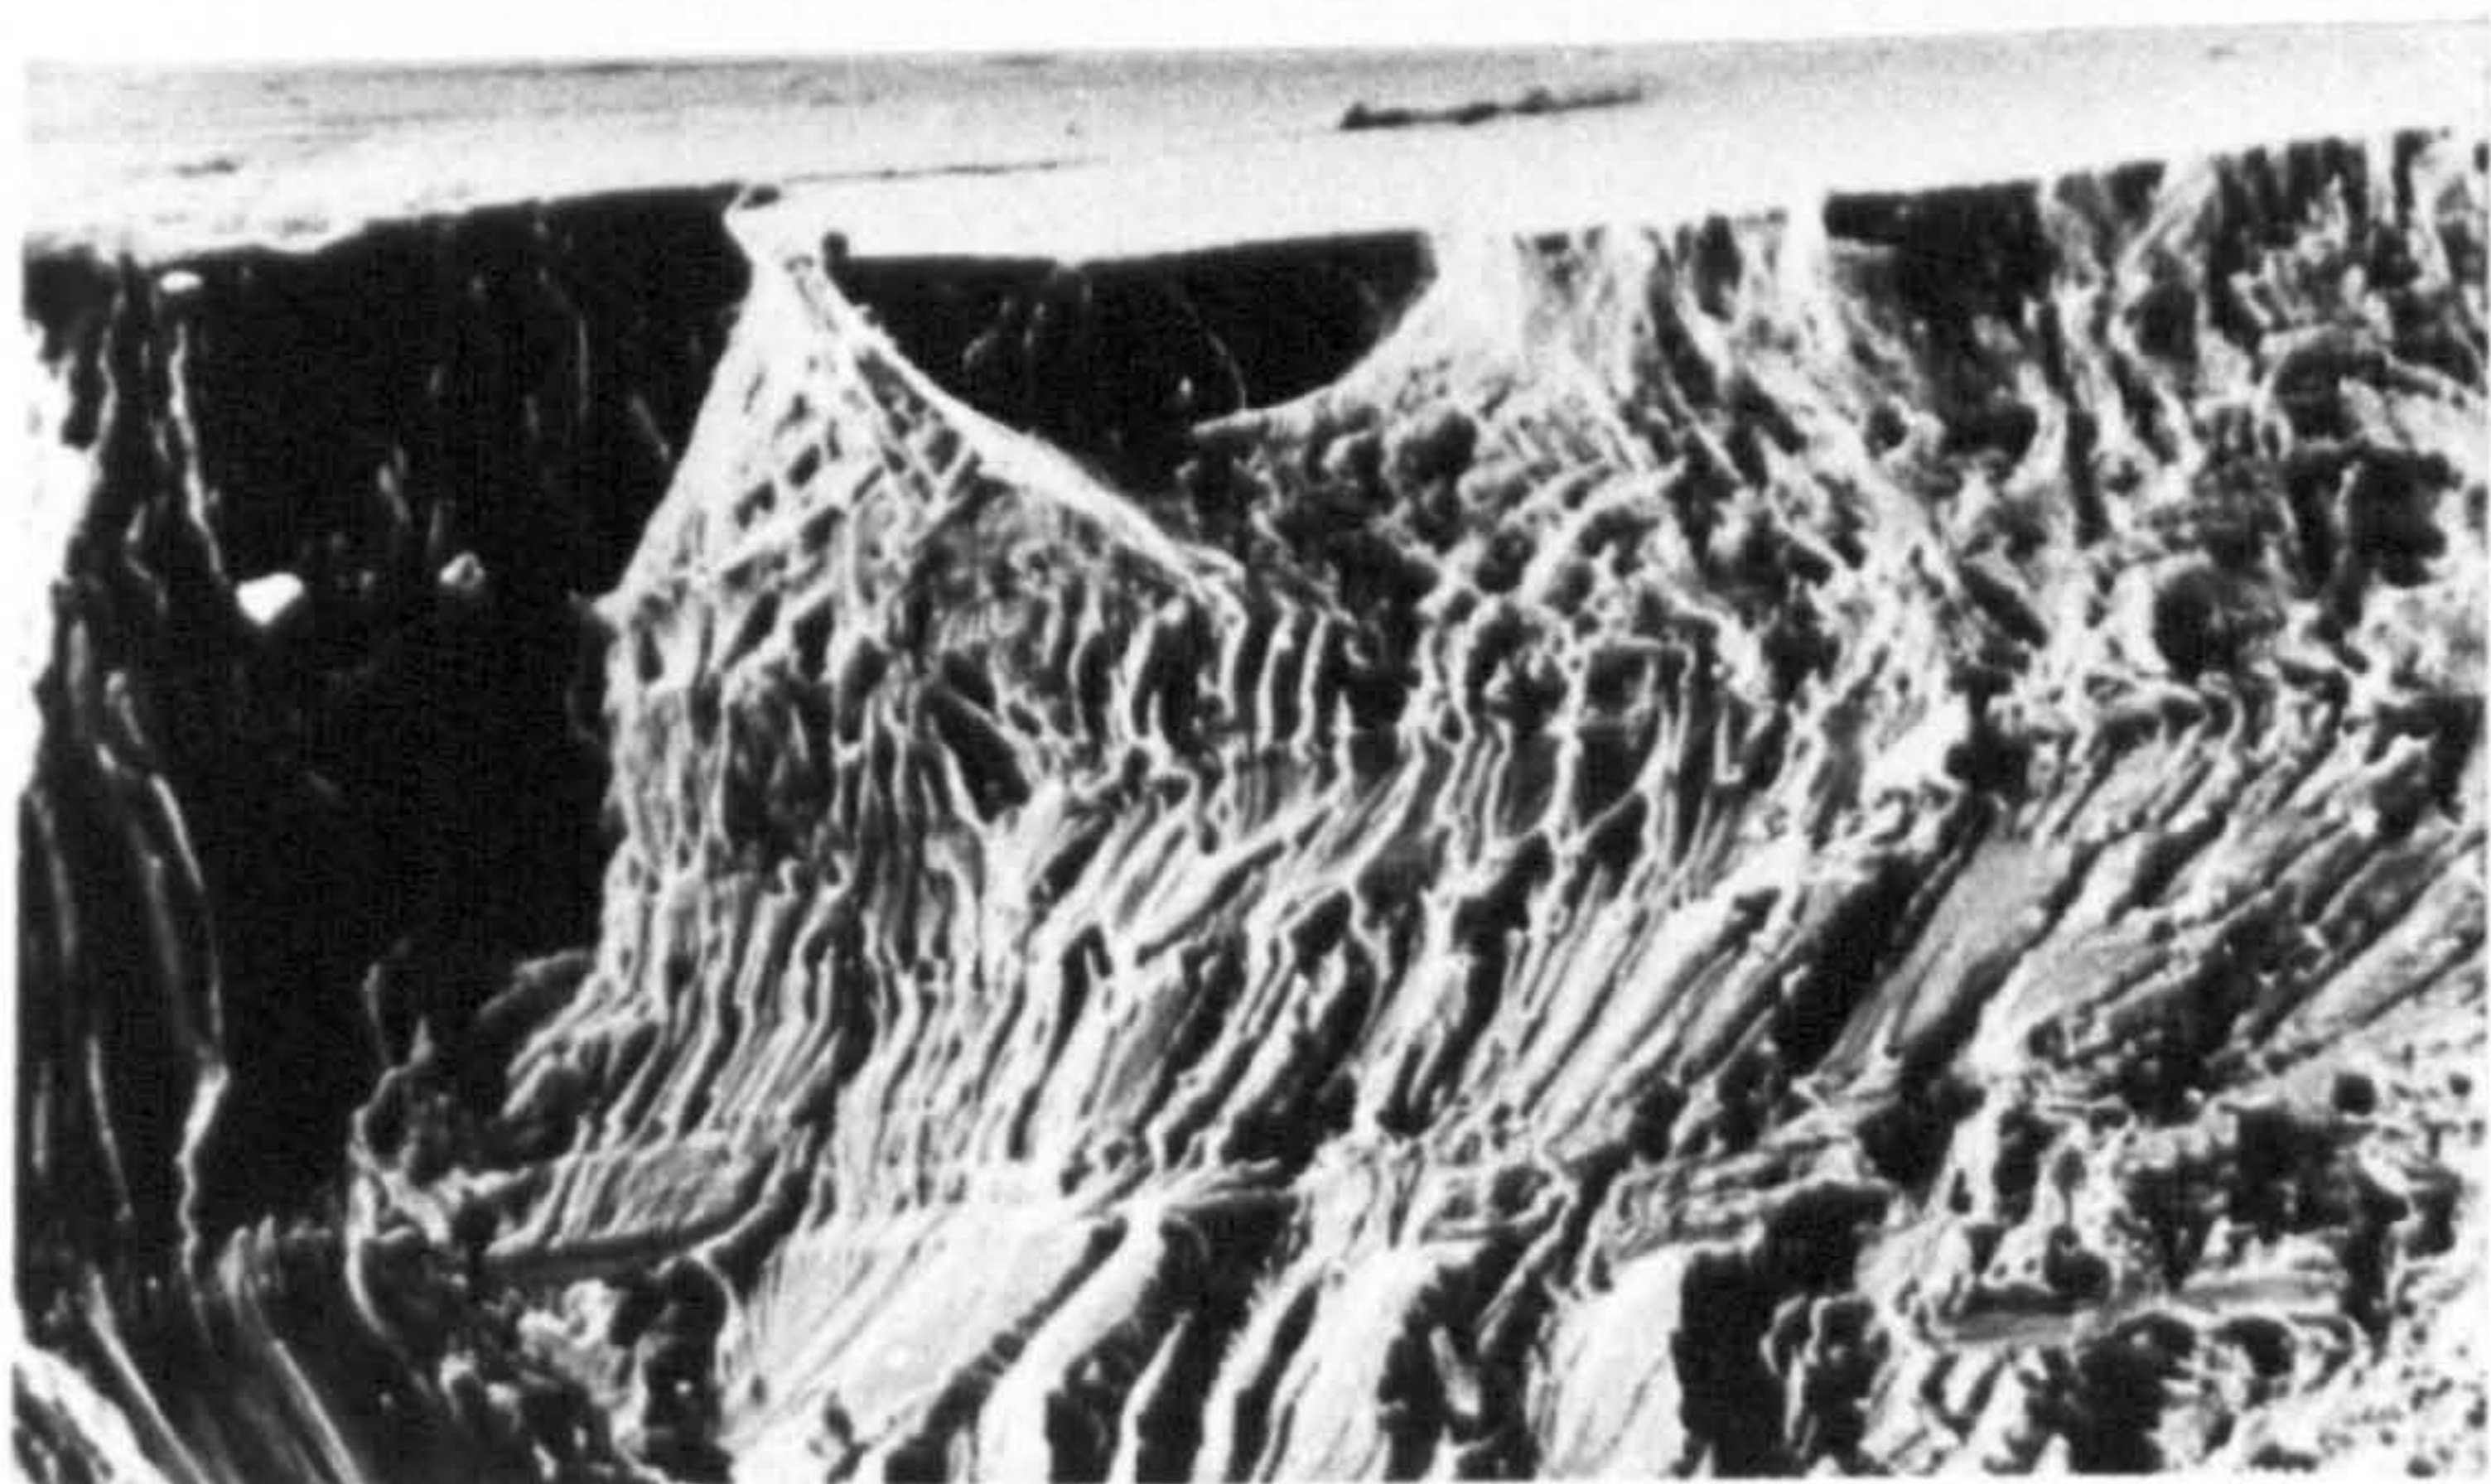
Fatigue cracks growing from dimples at the base of the notch in a fractured, lightly peened reversed-bending specimen (alloy 7010).
